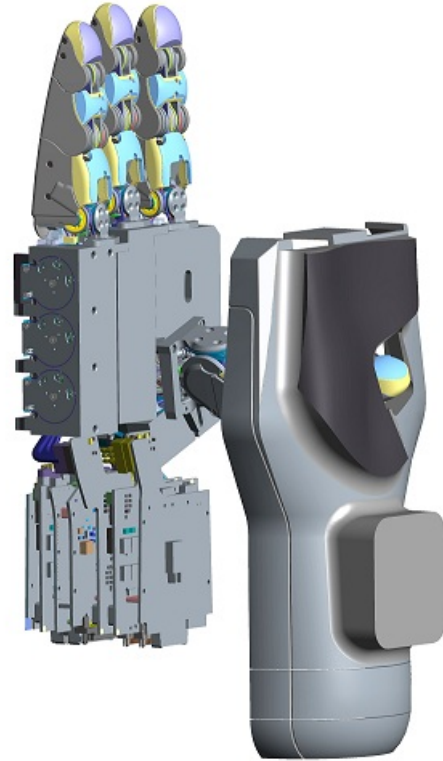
CAD view of the wrist/palm half shell. The fingers and the PCB stack can be placed independently
